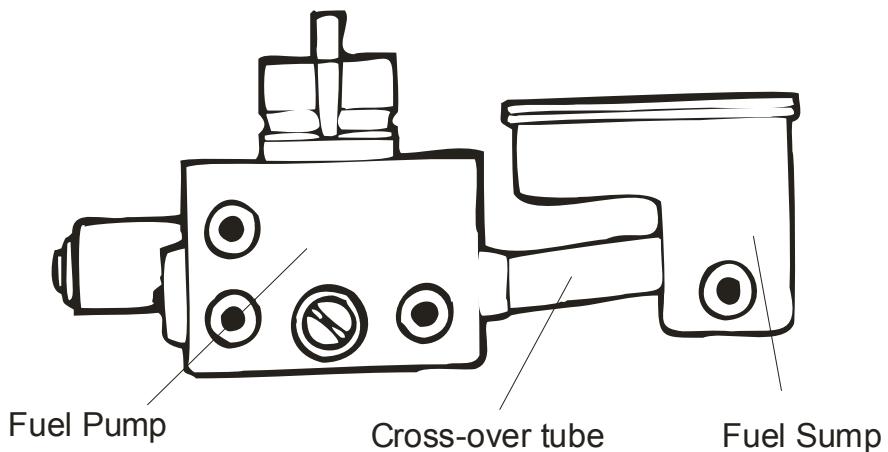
Fuel Pump/Fuel Sump Assembly
